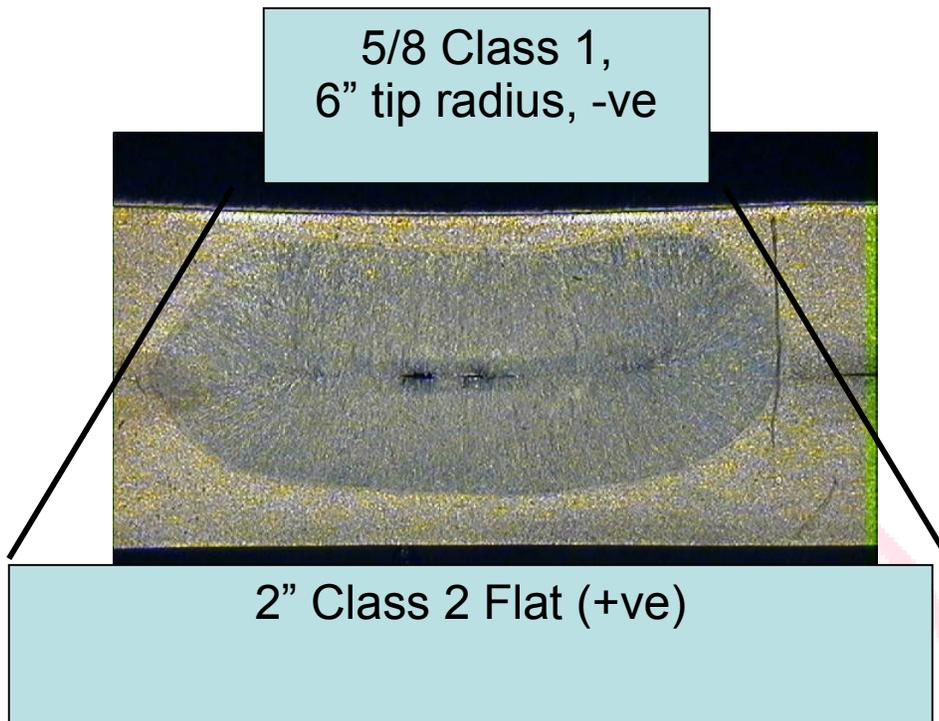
Photomicrograph of a weld section between two sheets of steel formed with electrodes of differing tip shapes shown schematically on either side. The difference in electrode tip shapes has helped pull the weld nugget towards the upper sheet leaving the lower sheet surface with practically no indentation.
